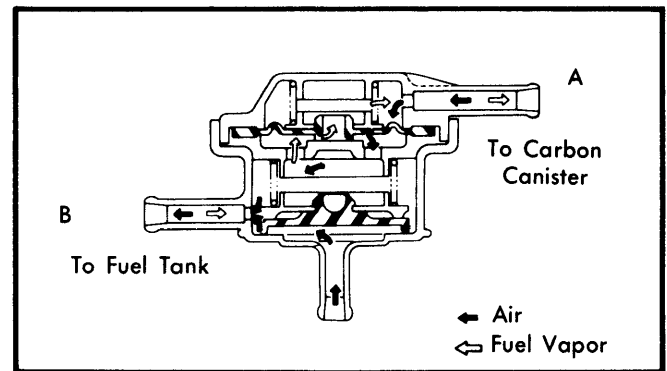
Check Valve With Vacuum Relief Valve (280ZX)
